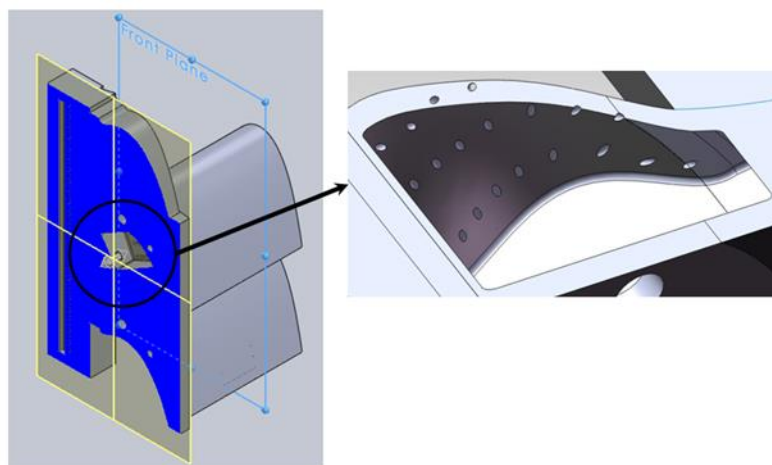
Discrete hole coolant cavity (a) section plane, (b) coolant cavity inside view
